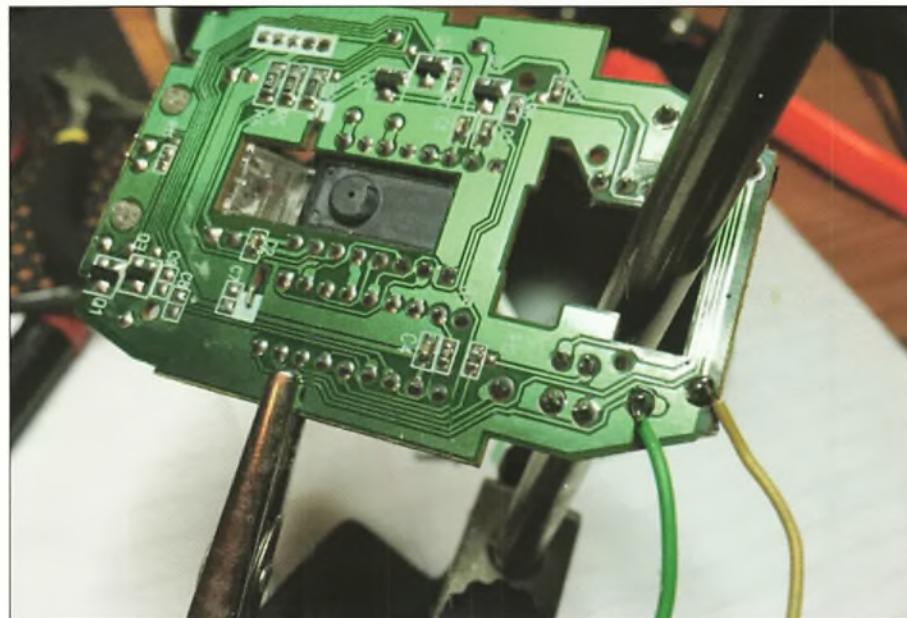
Soldering two wires onto the left mouse switch contacts.
